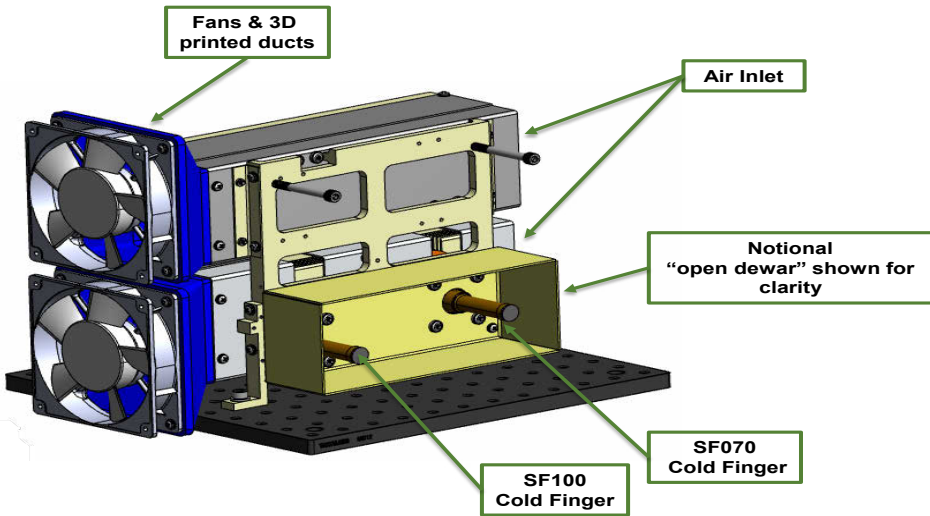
Cryocooler Subsystem Test Setup – Cryocooler Cold Tip View
